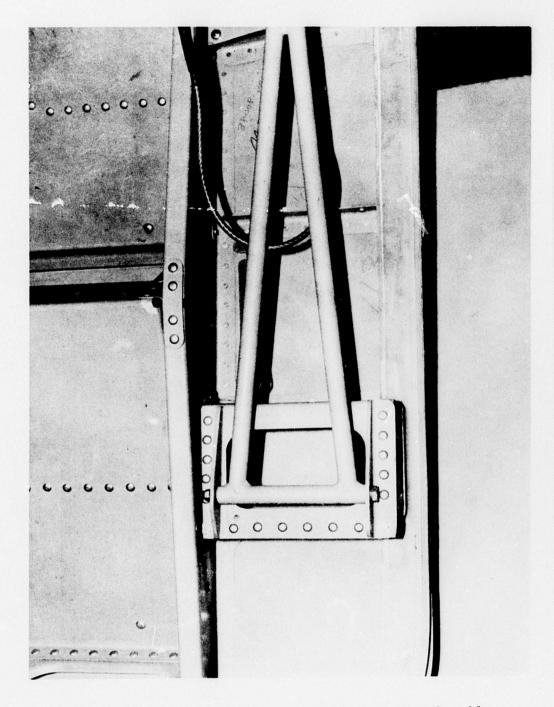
Lower Personnel Door, Redesign, Support Assembly.
